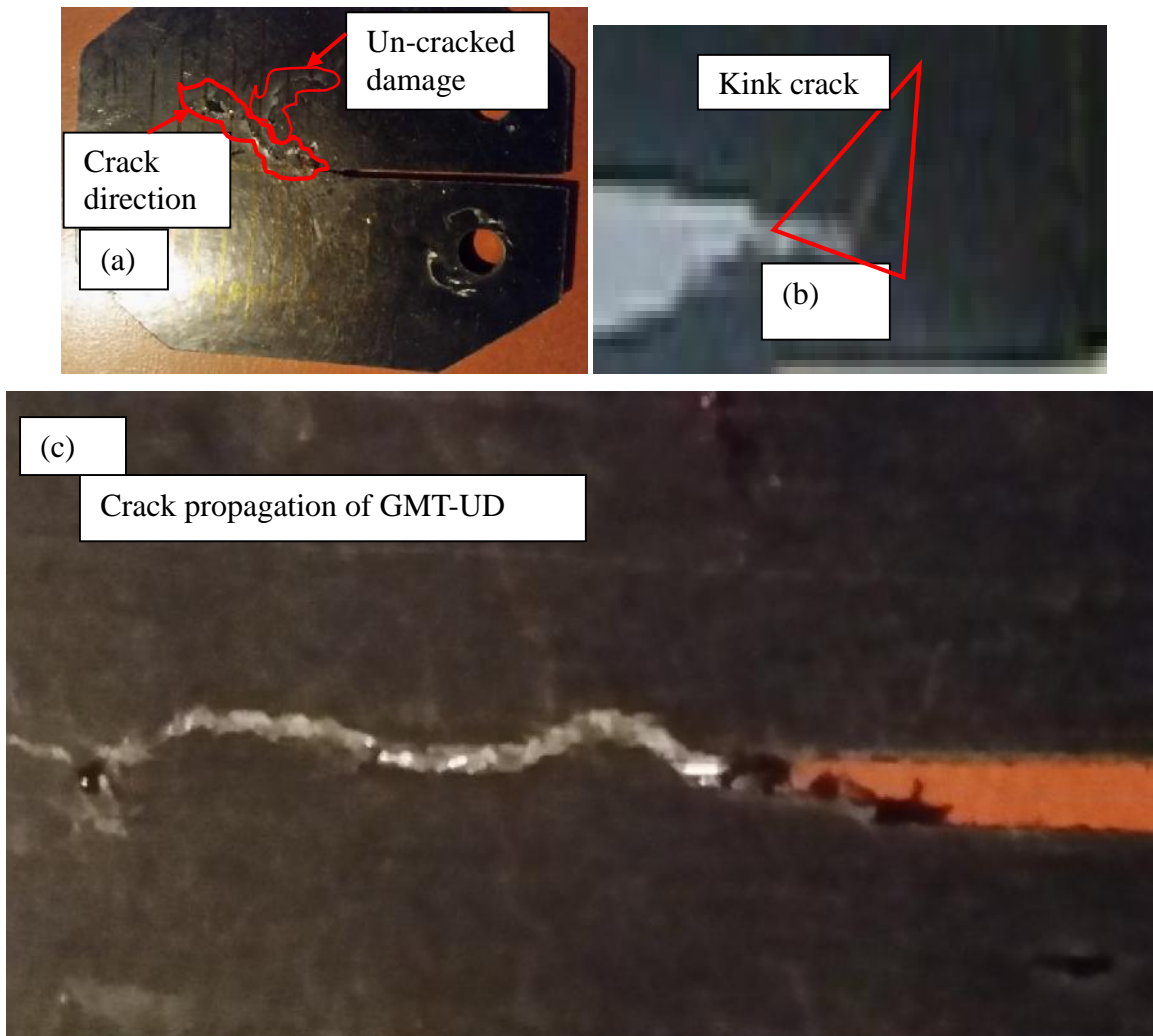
Fractography of (a) cracked specimen of GMT, (b) crack growth and direction of GMT, (c) cracked specimen of GMT-UD
